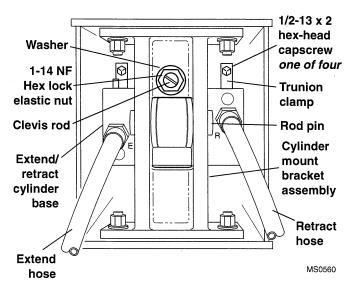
Open the rear cover to begin removing the extend/retract cylinder.
